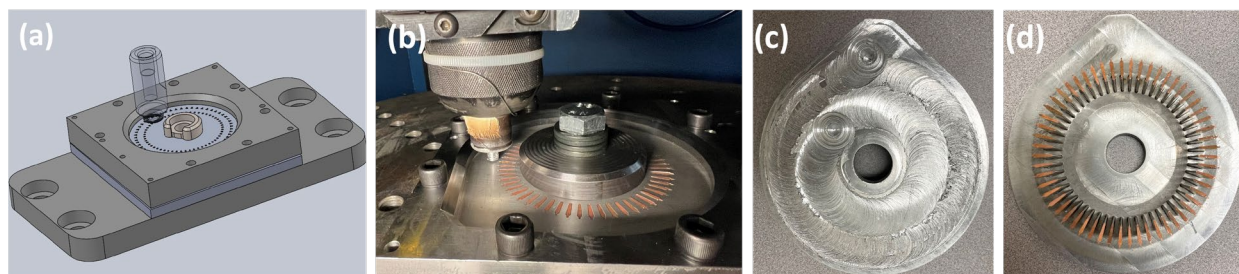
(a) Schematic drawing showing isometric view of a mock end-cap setup. (b) Al to Cu shorting bar mock end-cap setup, ready to be welded in a rotary FSW system at PNNL. (c) Top-view of end-cap rotor. (d) Bottom view of end-cap rotor. Source: PNNL.
